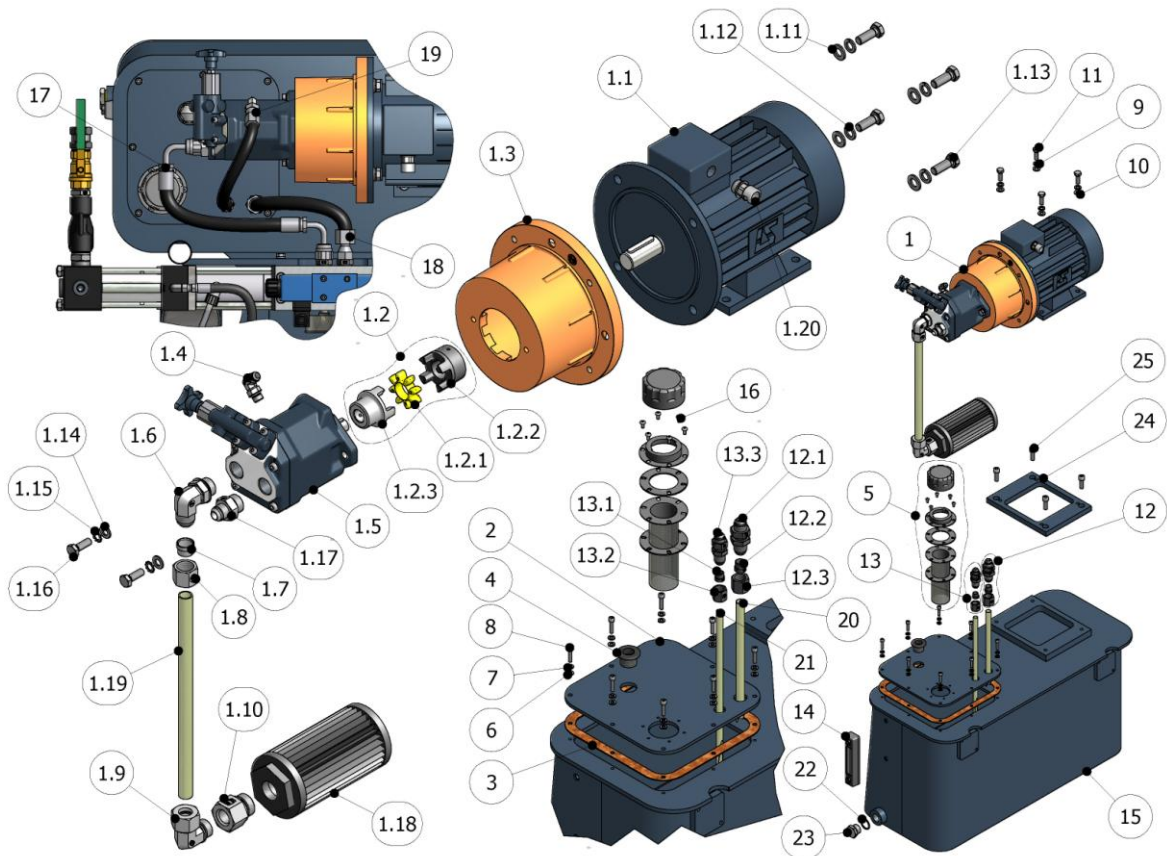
Hydraulic Manifold 3x400v50/60Hz (hyd. Pump 16 cc), Exploded View
